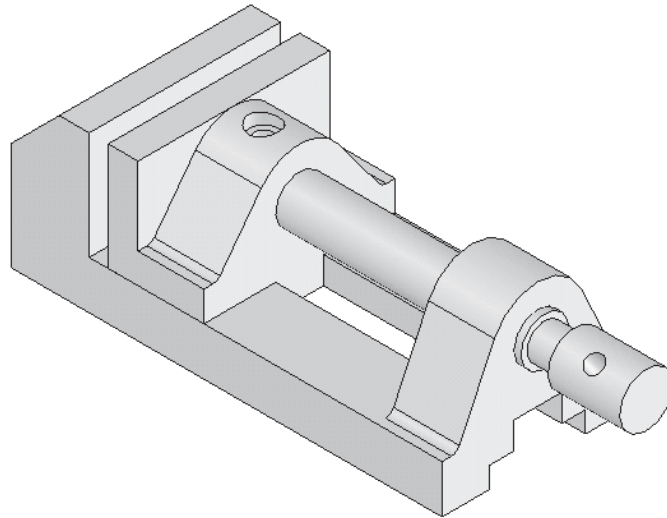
Assembly after applying the Coincident mate to the Jaw Screw
